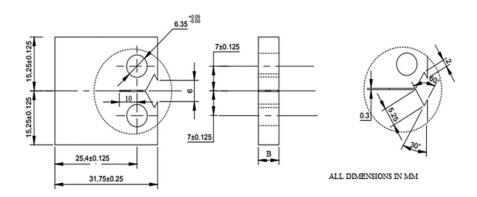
Dimension of CT Specimen (B = 5mm and 6.2mm) [13].
